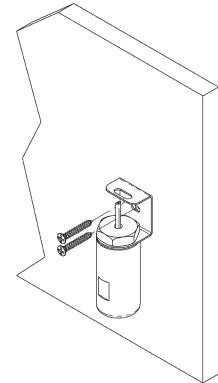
1" Hanging Bracket Wall Installation (Transmitter Mounted Externally)
